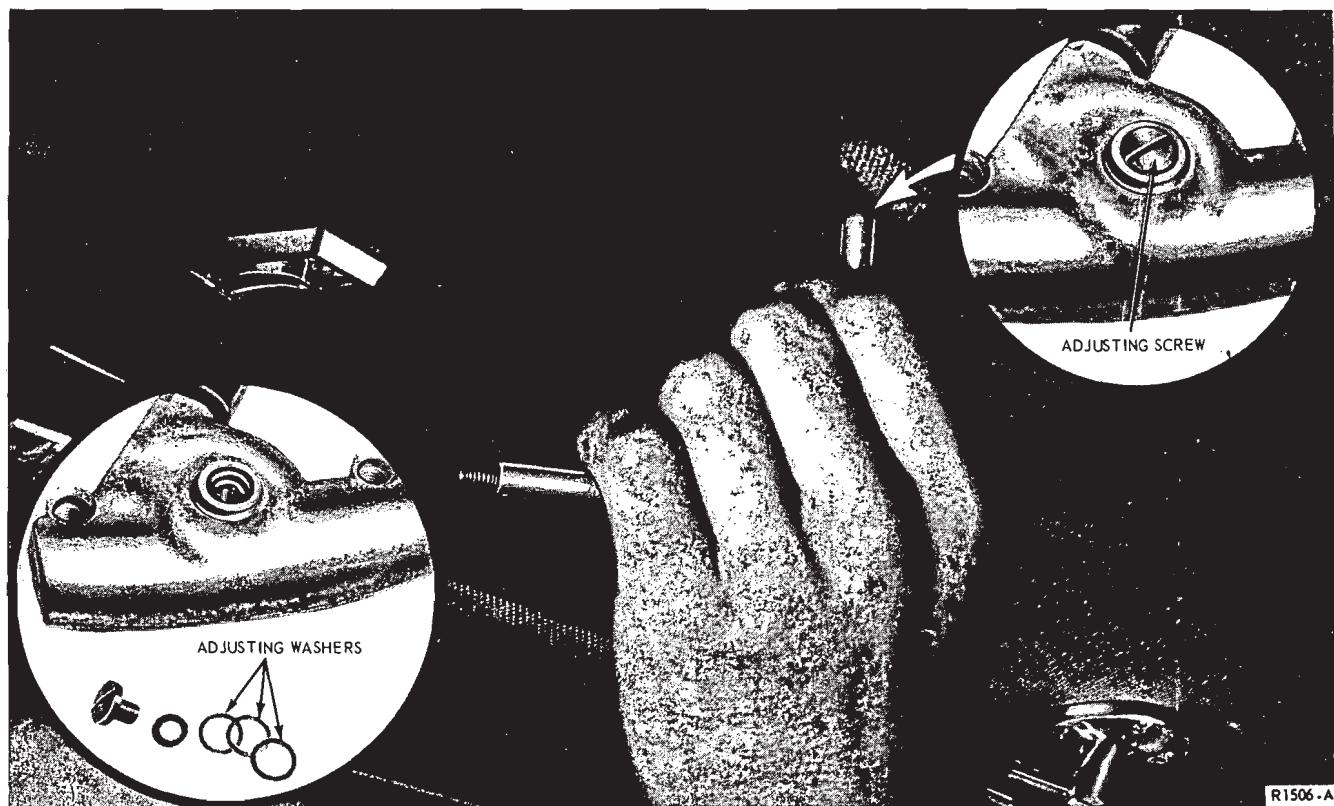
Auxiliary Drive Slipping Clutch Adjustment
